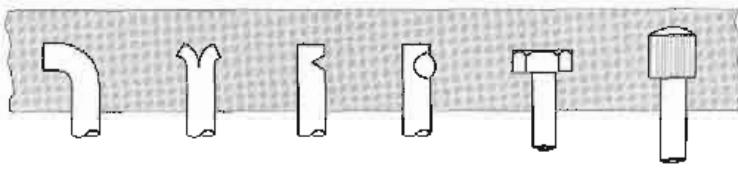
Typical metal inserts used to provide threads, cavities, holes, and alignment pins in plastic parts.
